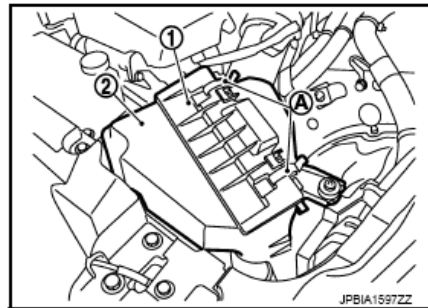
Identifying Air Cleaner Case, Holder And Clips
